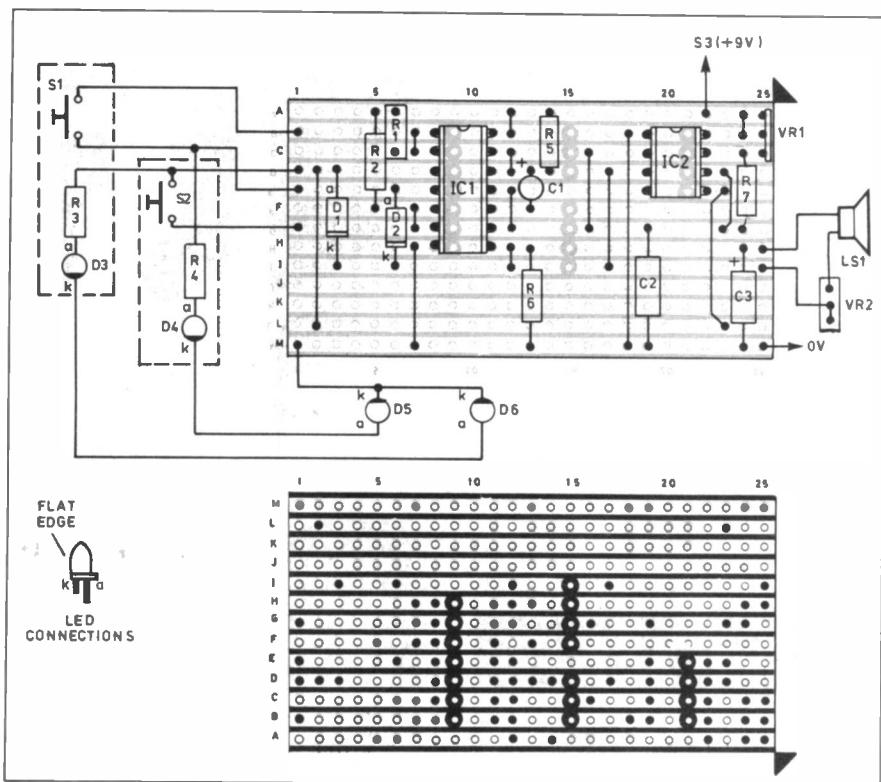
Topside component layout and underside stripboard track cuts and solder joints for the On Your Marks unit. Components inside the dashed boxes represent the slave units.
